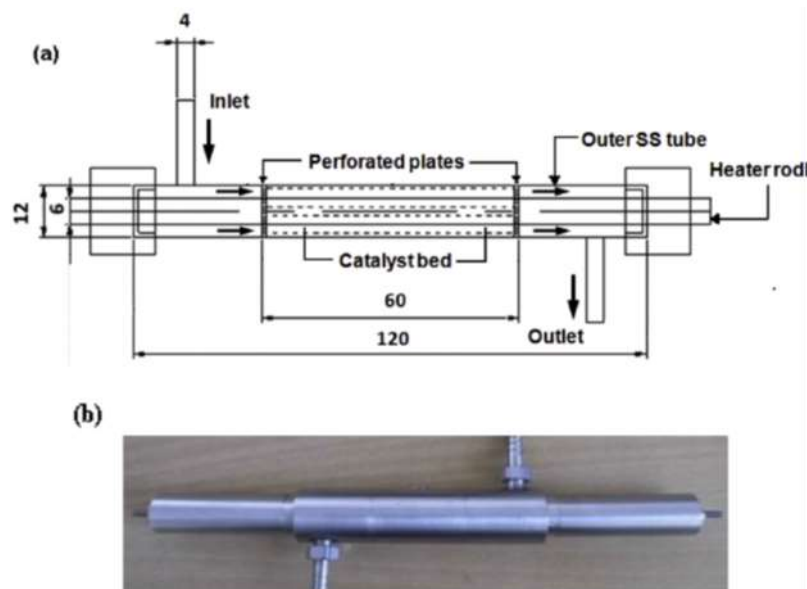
2 (a) Configuration of the tubular packed bed reformer, (b) Photograph of the assembled reformer tube [54].
